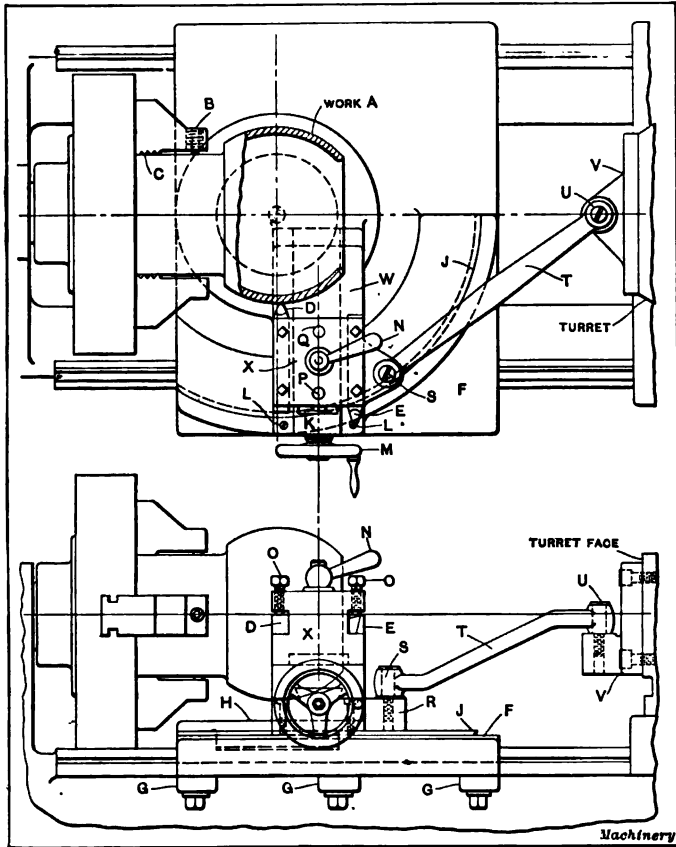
Spherical Turning Device for Horizontal Turret Lathe
